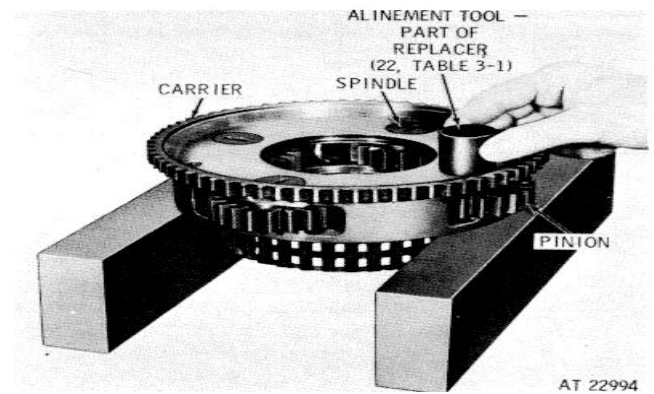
Alining pinion assembly in intermediate-range planetary carrier.
